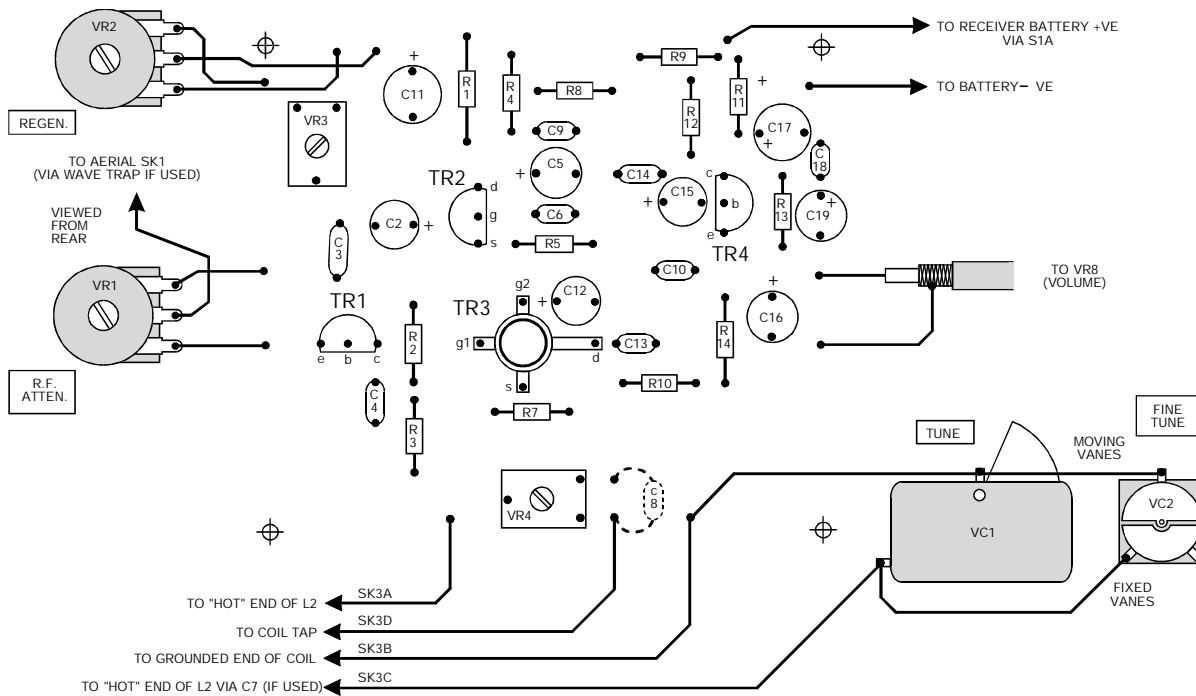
Main PCB layout and wiring and (below) approximately full-size copper foil master for this board.
